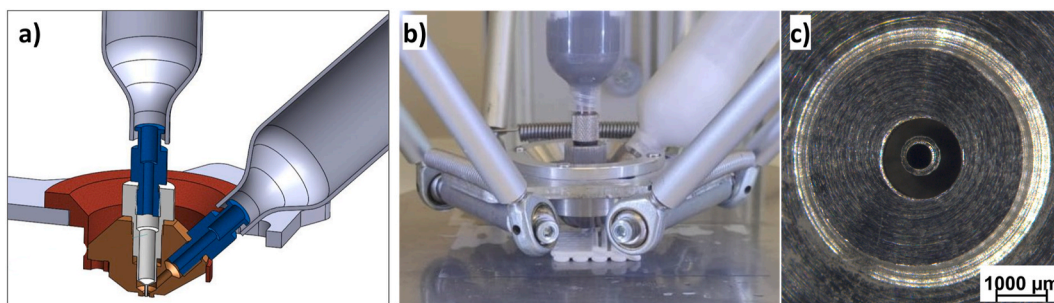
a) Co-extrusion nozzle design; b) real components; c) detail of core and shell diameters.
